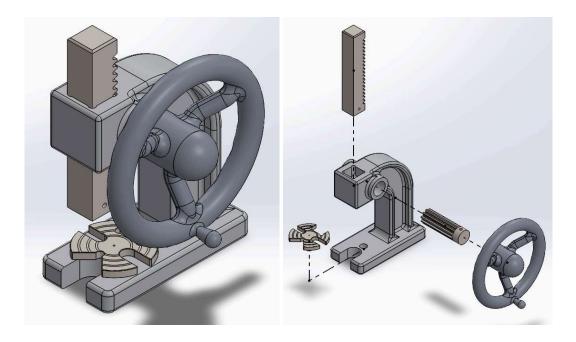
Arbor Press Assembly (Left) and Exploded View (Right)
